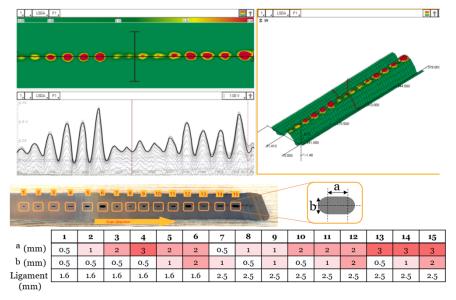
Dimensions of the electrical discharge machined notches fabricated on the bottom of the titanium WAM components and the eddy current inspection results when the array is scanned from the top as-built surface of the sample.
